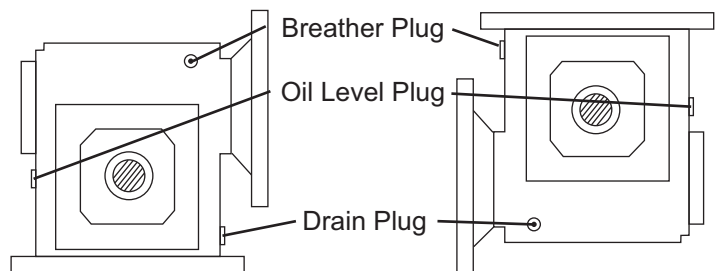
GEARBOX SCHEMATIC (TYPICAL)
